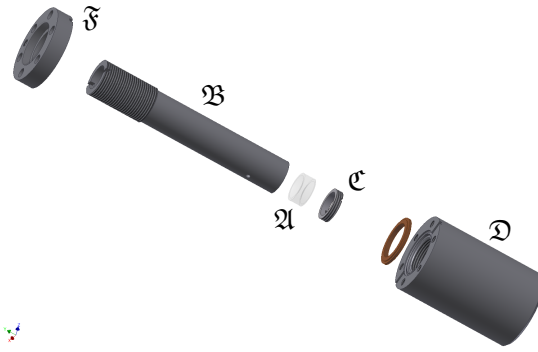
Assembly of the Lens Holder — A quartz lens^a (A) is inserted into the holding tube (B). The lens is held by a small threaded retainer ring (C). The tube itself is screwed into the beam housing (D, partially shown) allowing to adjust the position of the focal point. The 16CF flange opening is sealed by a quartz 16CF window^b (F).
